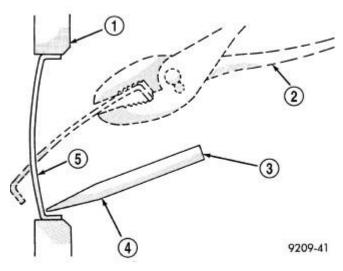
Core Hole Plug Removal Courtesy of CHRYSLER LLC
